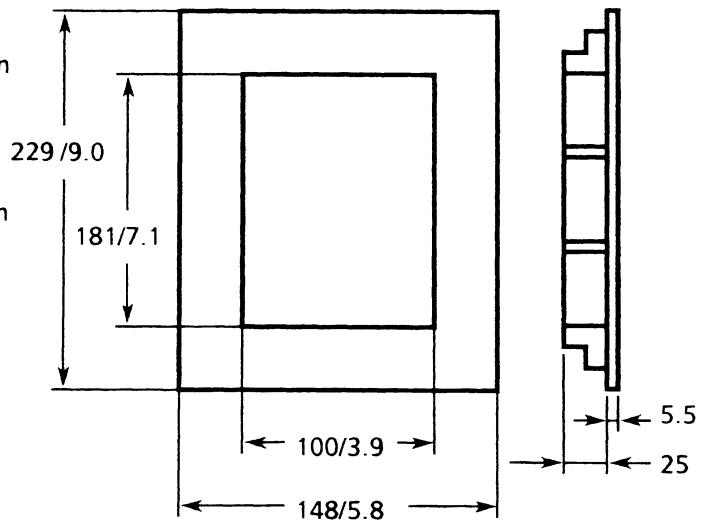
Cutout Dimensions (in mm/in.) for Panel Mounting
